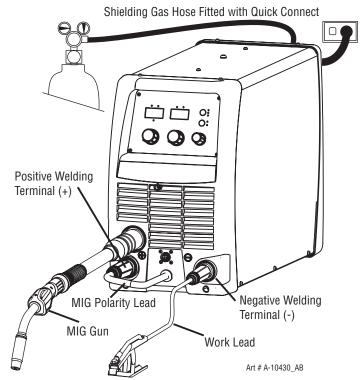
Setup for MIG Welding with Gas Shielded MIG Wire
